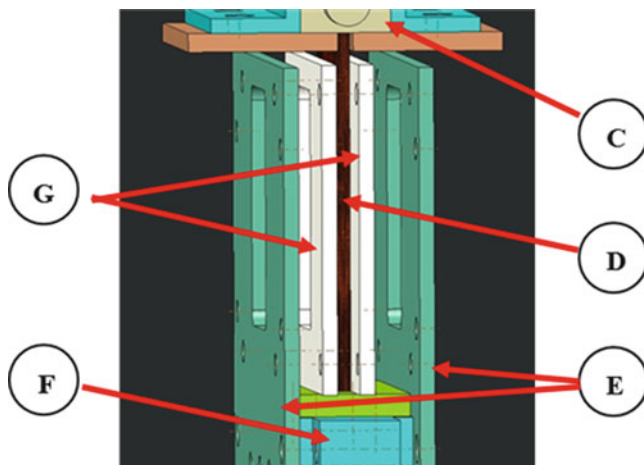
Side view of CDI fixture – C: load transfer block D: sample, E: *front and back* support plates, F: *bottom* support bar, and G: inner slip-fit support plates
